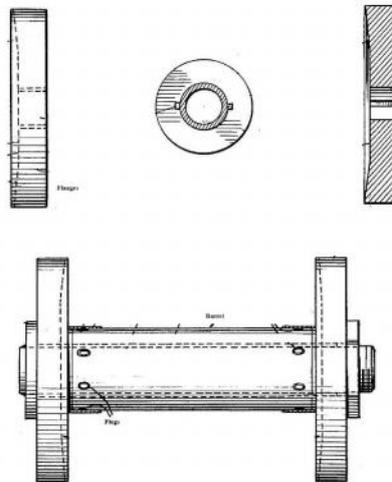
Warp knitting beam- Detailed view (Storey, 1965)
